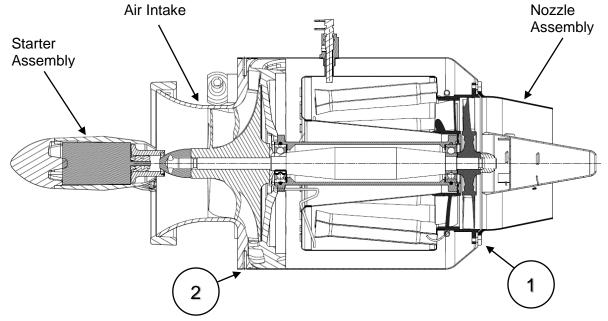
Jet Engine Assembly; Front cover not depicted
